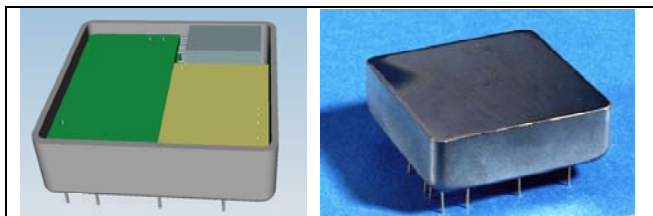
Schematic and photograph of CSAC module assembly and packaging.
